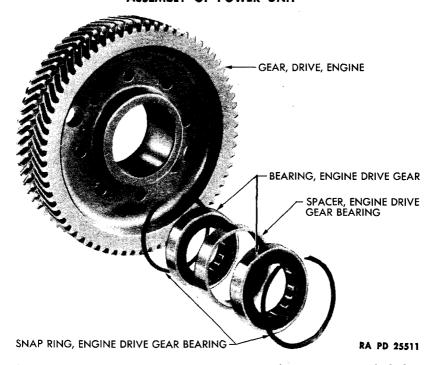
Engine Drive Gear, Bearings And Snap Ring, Exploded
